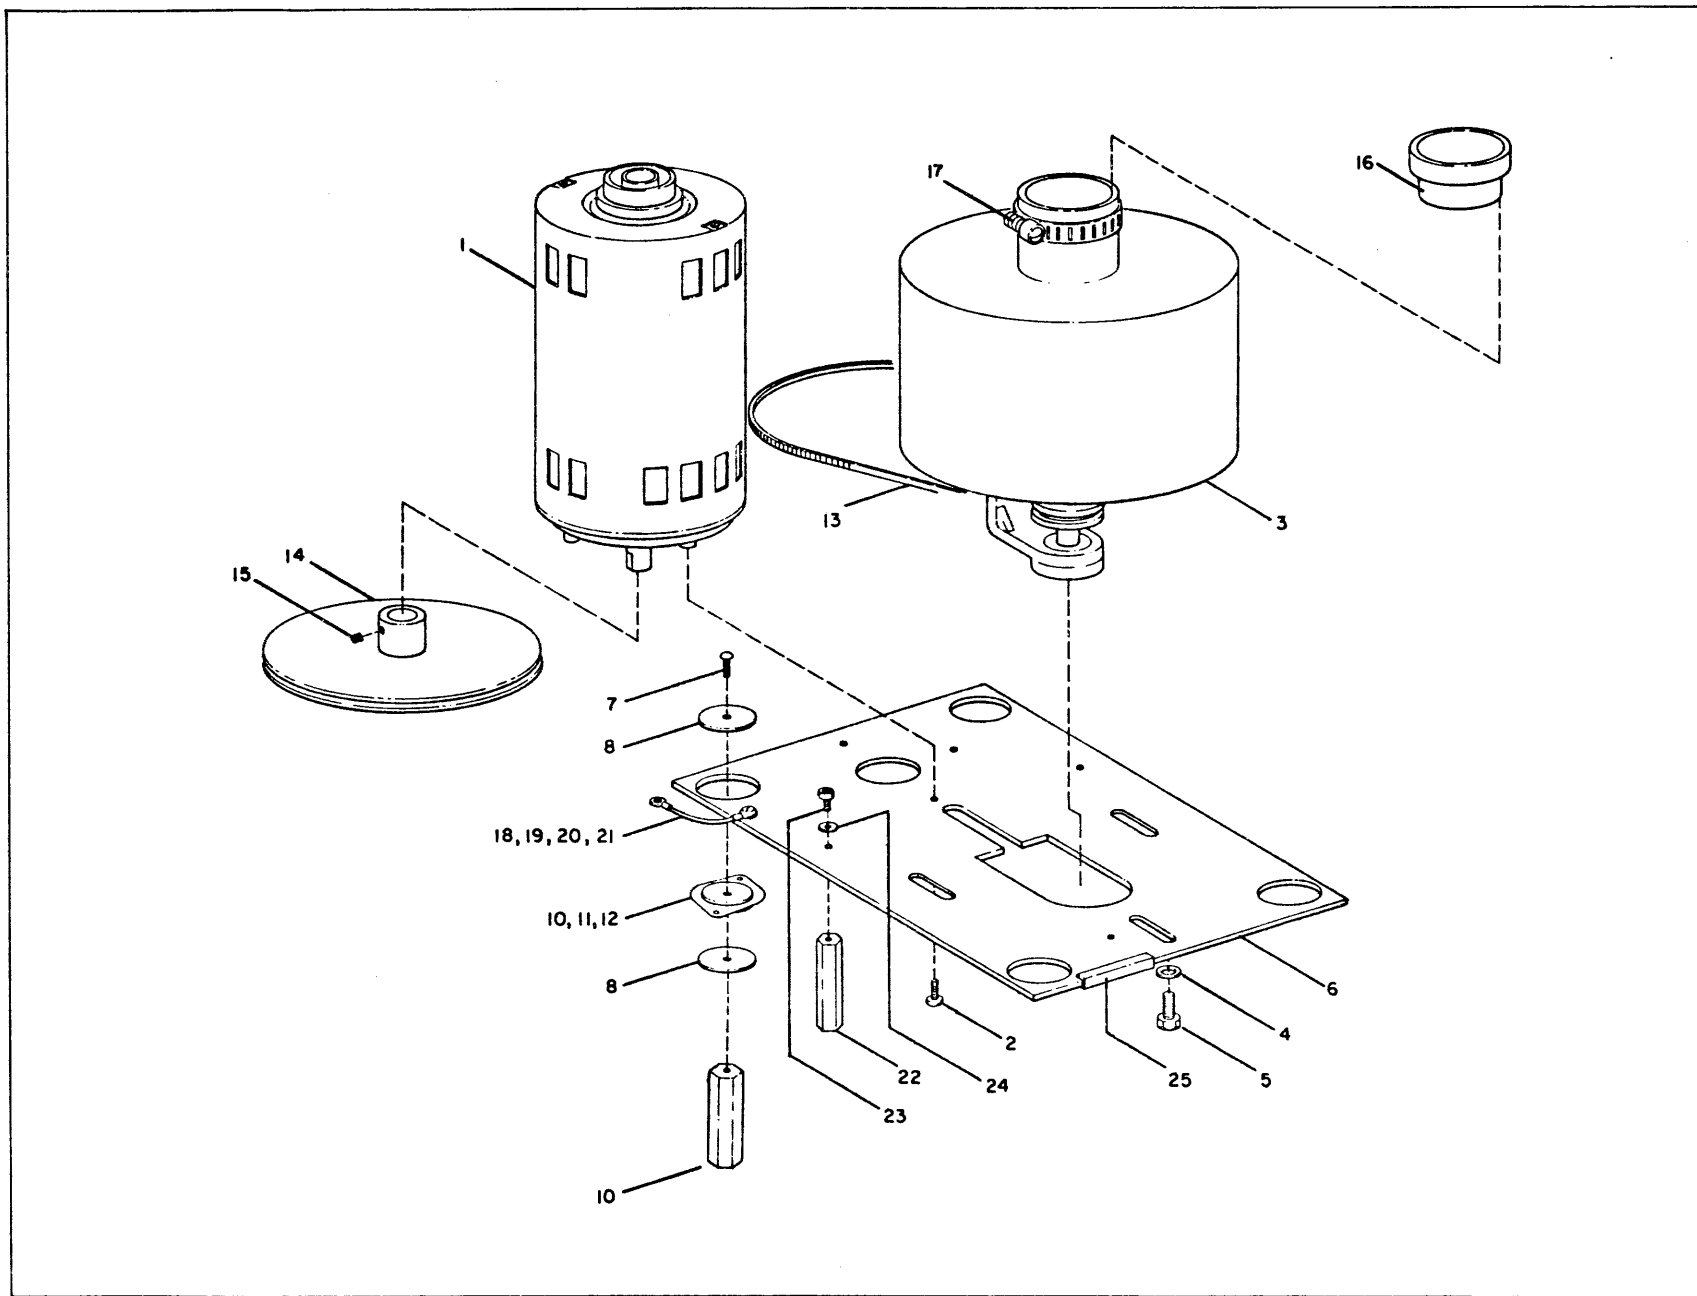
VACUUM PUMP ASSEMBLY
